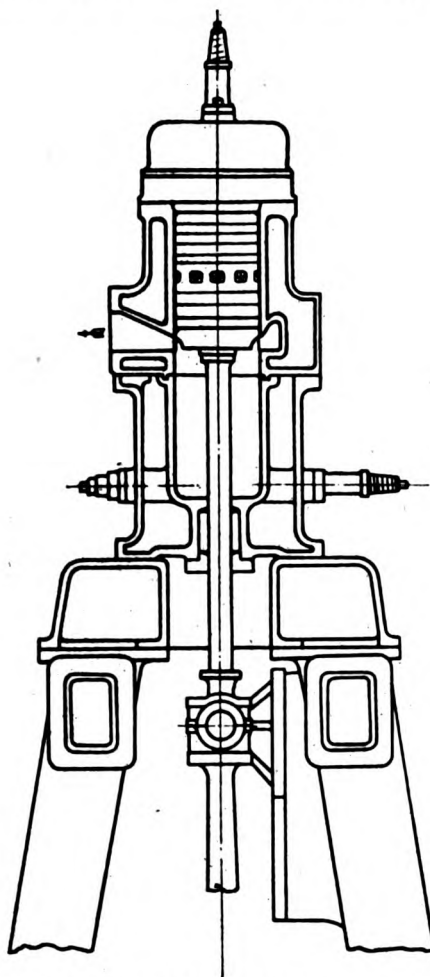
Section of Blohm & Voss double-acting Diesel engine of motorship "Fritz"
